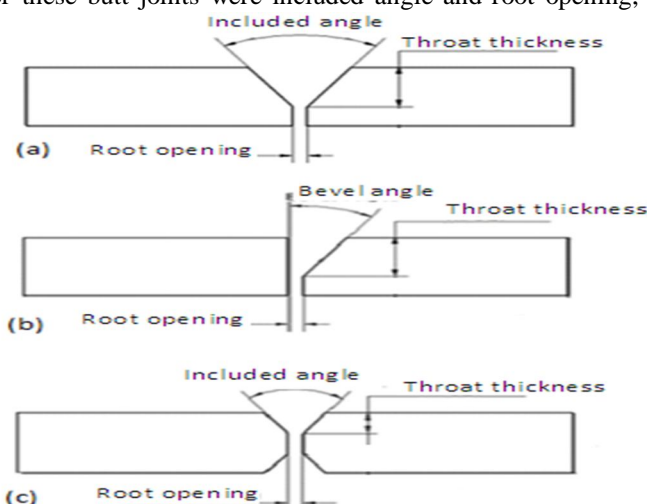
Geometry of Single (a) V-Groove, (b) Bevel-Groove and (c) Double V-Groove butt joints
